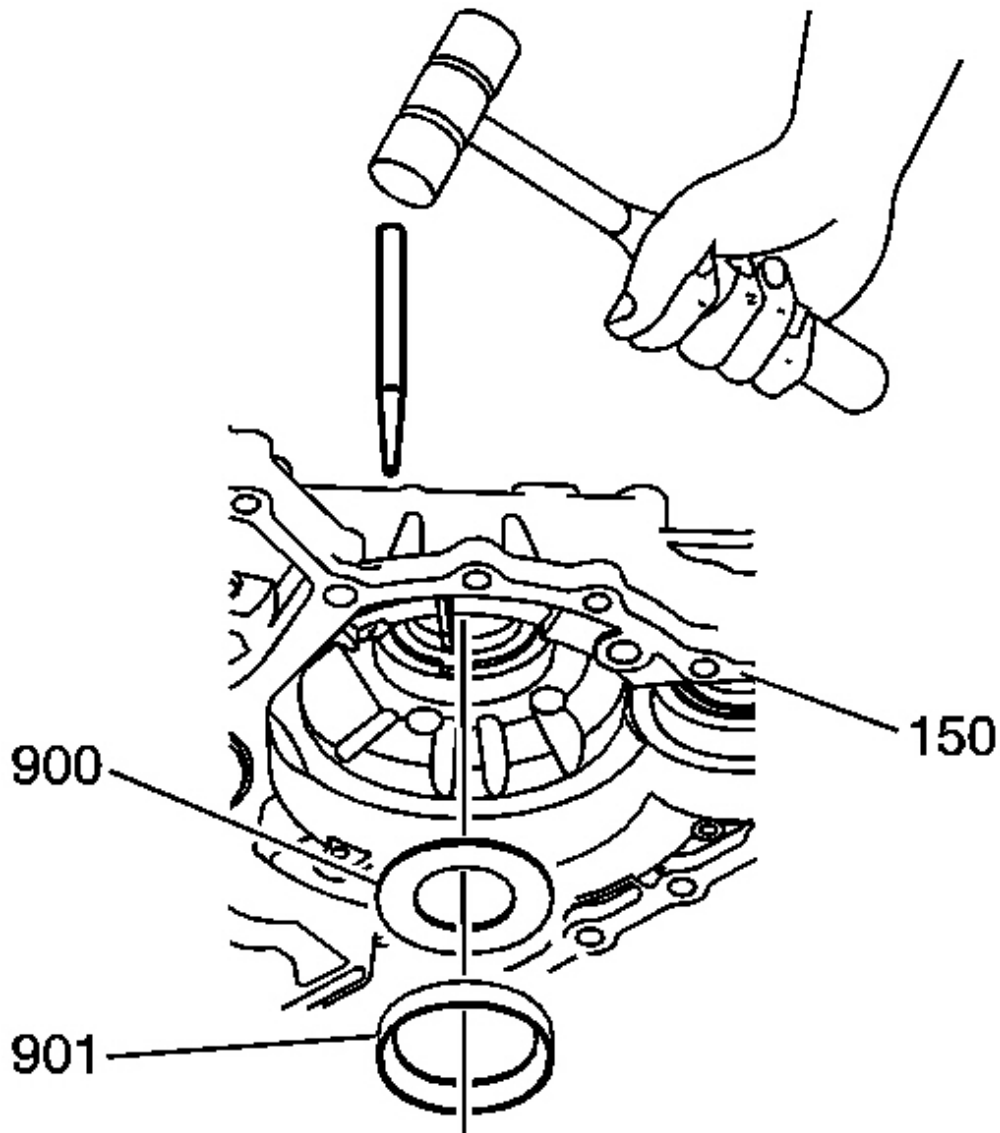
Removing Front Differential Tapered Front Roller Bearing Race From Torque Converter Housing Using A Hammer & Punch
